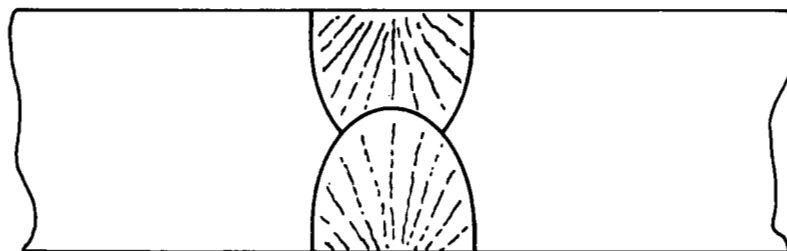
shows schematically how welding conditions could affect the strength of a weldment. When a square butt joint is welded with very low heat input, low arc current and high travel speed, the penetration is shallow, as shown in Figure 8-4a and weld strength would be very low. When a joint is welded with medium heat input to obtain complete
